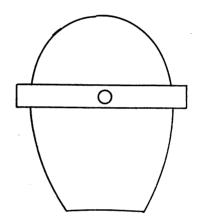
A SPRING HOLDS THIS PLATE IN POSITION
